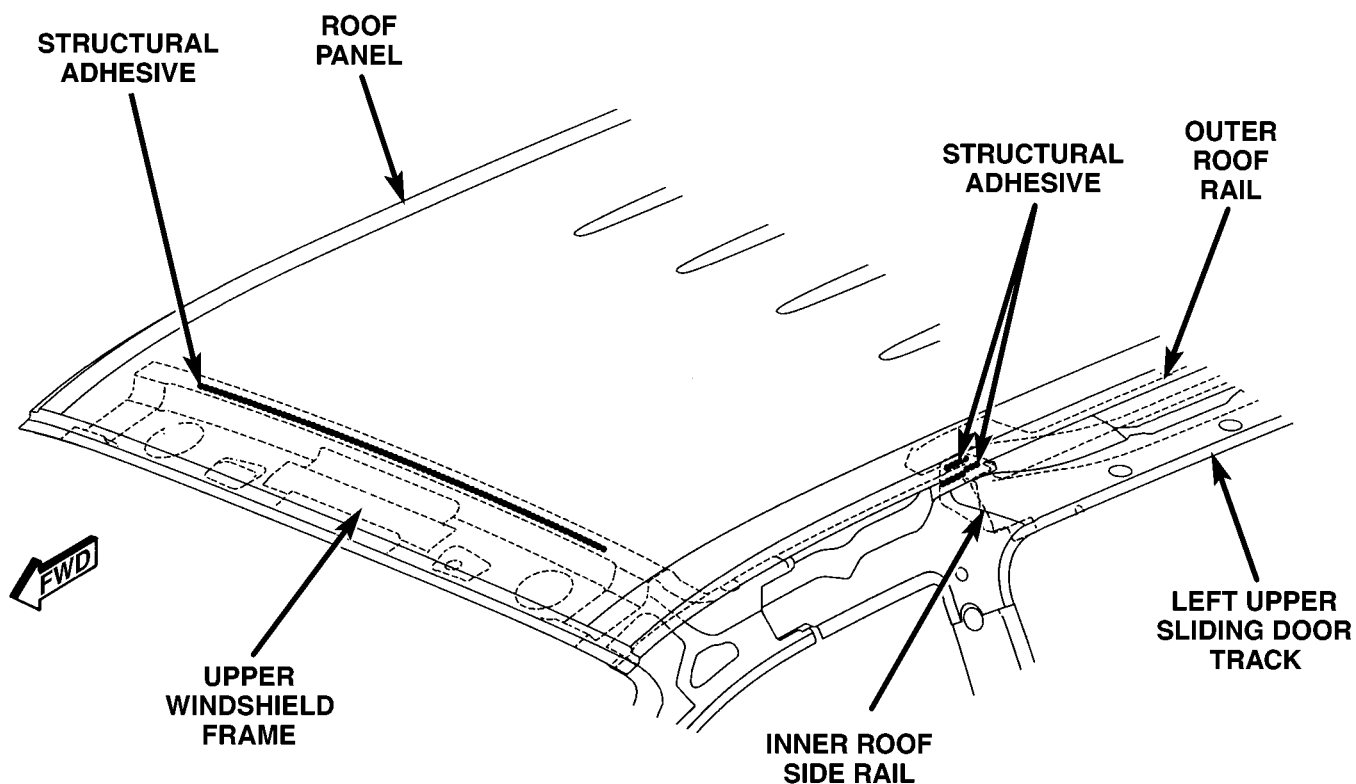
OUTER ROOF PANEL/UPPER WINDSHIELD FRAME
